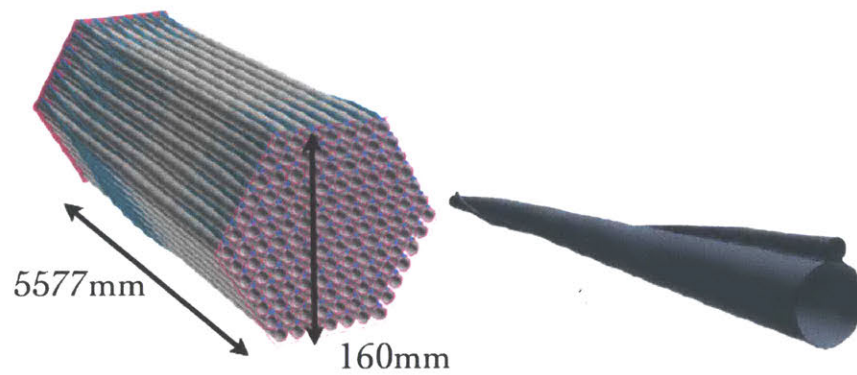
TWR assembly (Sosnovsky et al., 2015). Image at left shows dimensions of assembly. Image at right shows one rod and its wired wrap.
